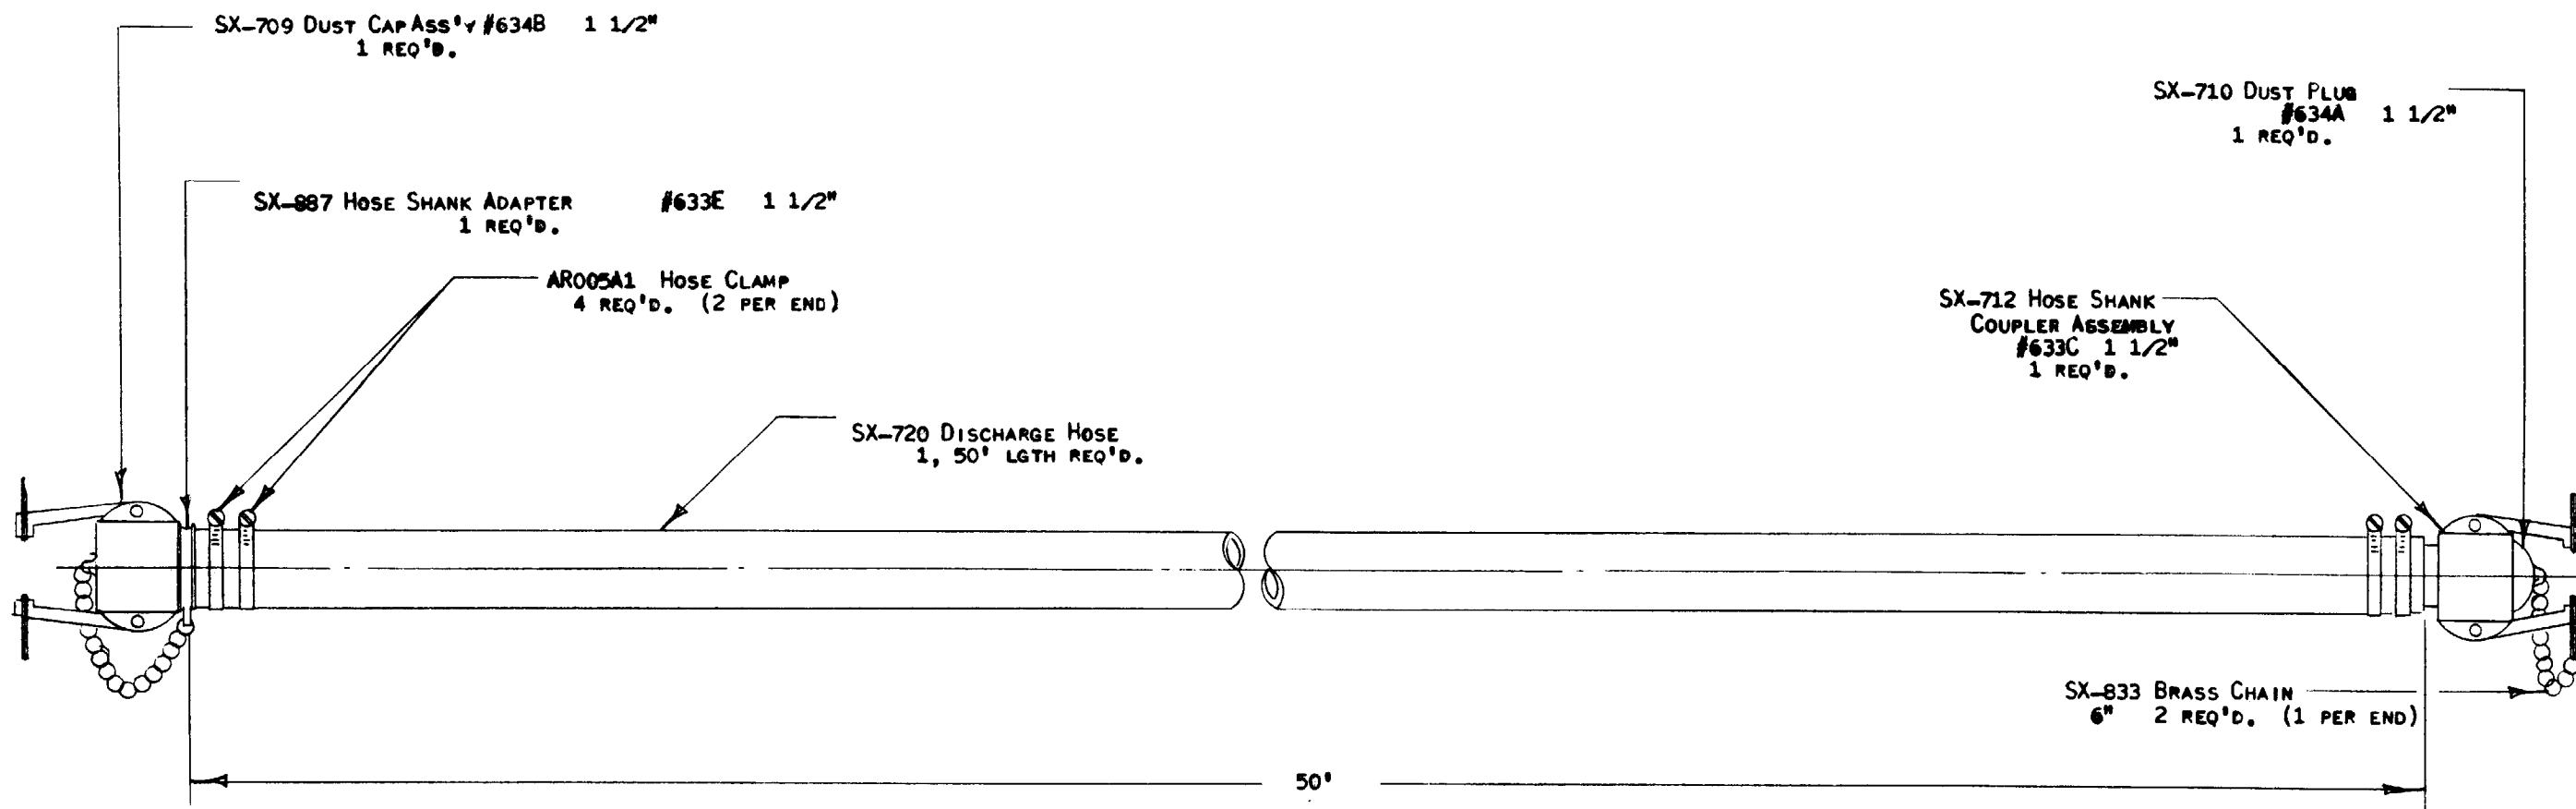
FUEL TRANSFER PUMP ASSEMBLY
